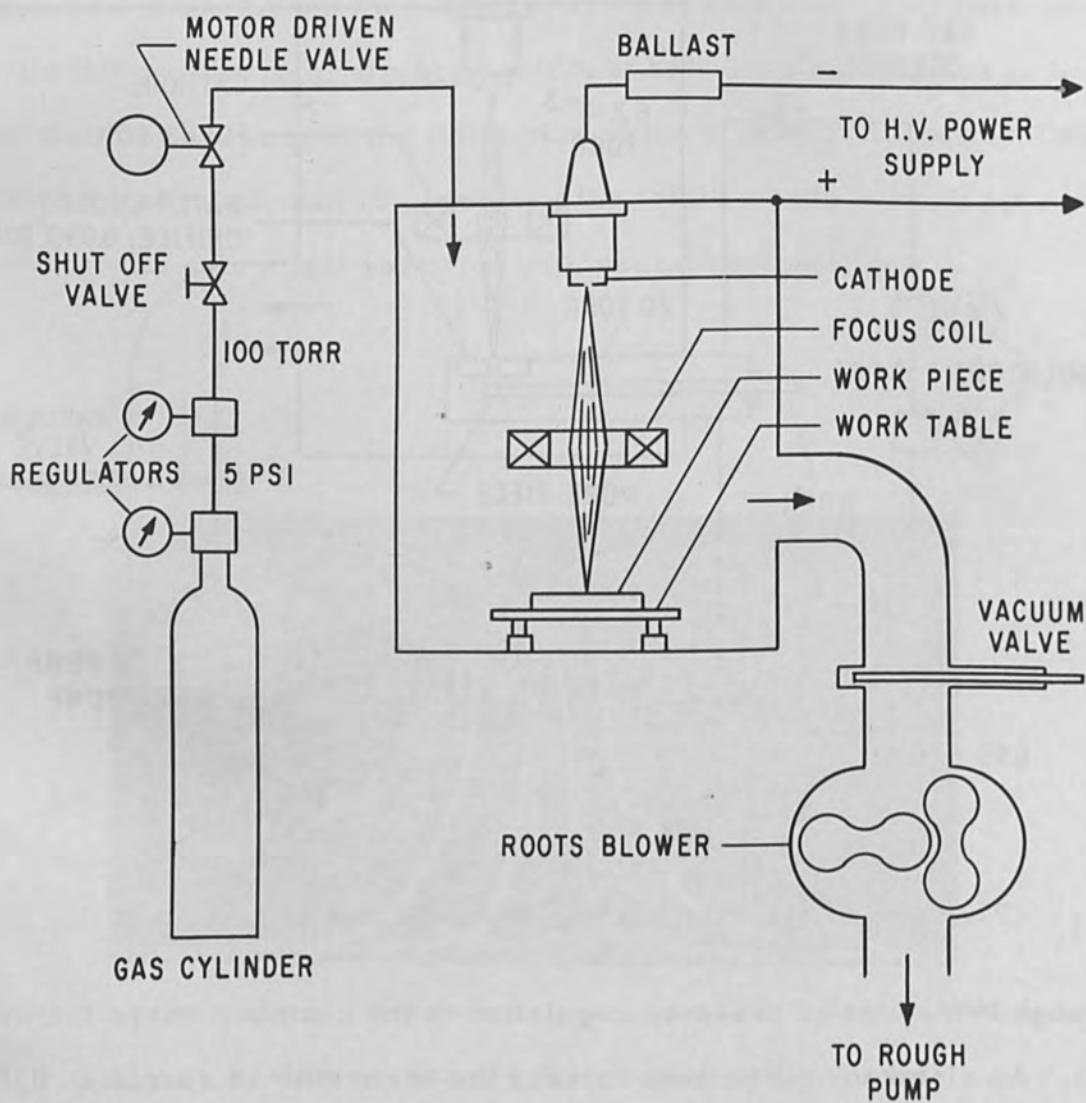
Heavy-duty welding system schematic diagram.
